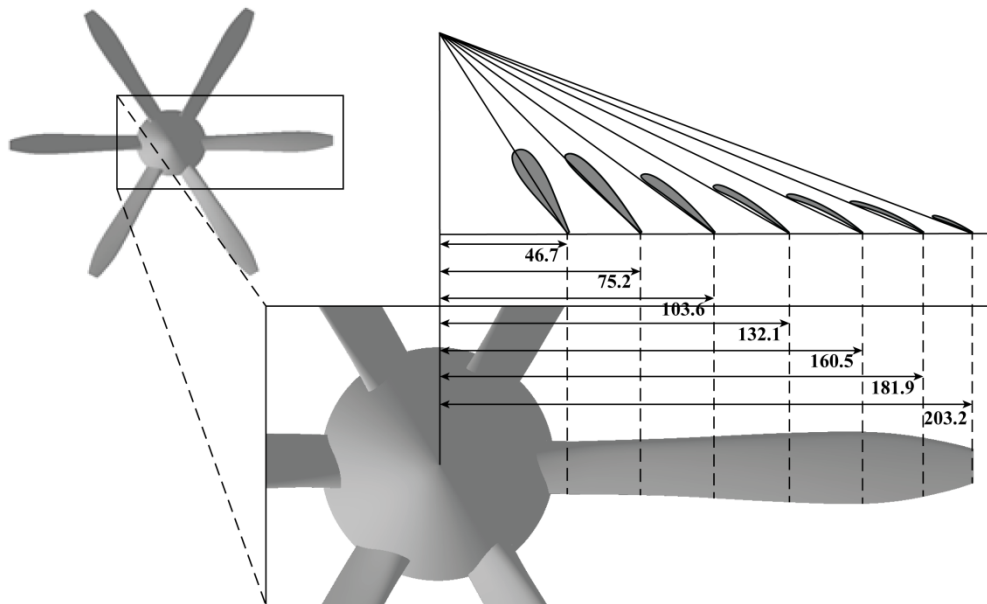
Propeller layout (dimensions in millimeters, courtesy of Ref. 19).
